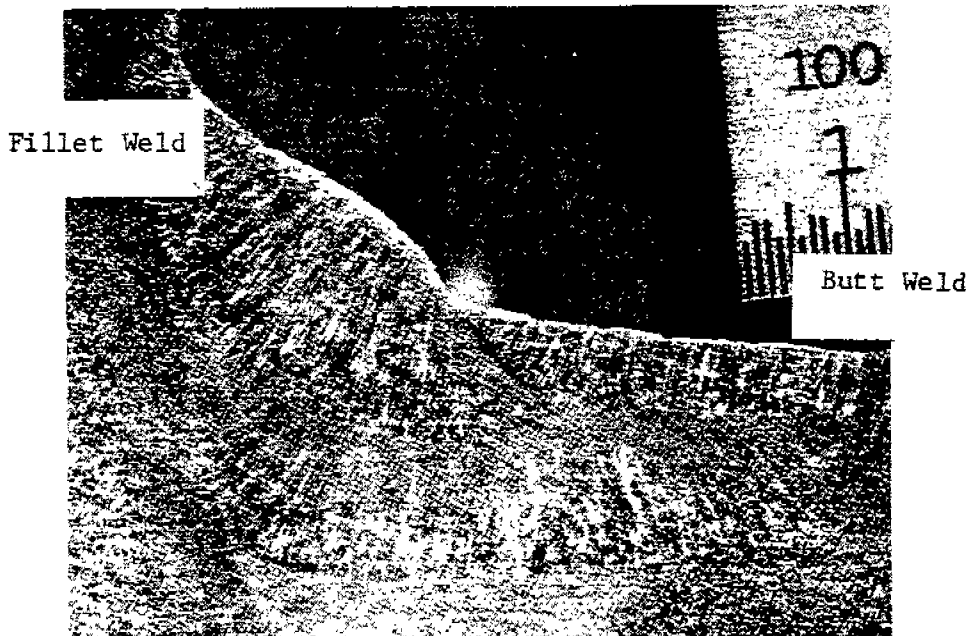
Juncture of Fillet and Butt Welds at Line A-B of Figure 3-43. Detail shows that butt weld was made over the fillet weld. Specimen No. 3908; Etch: Ammonium Persulfate; Magn. 1.5x & 5.7x.
